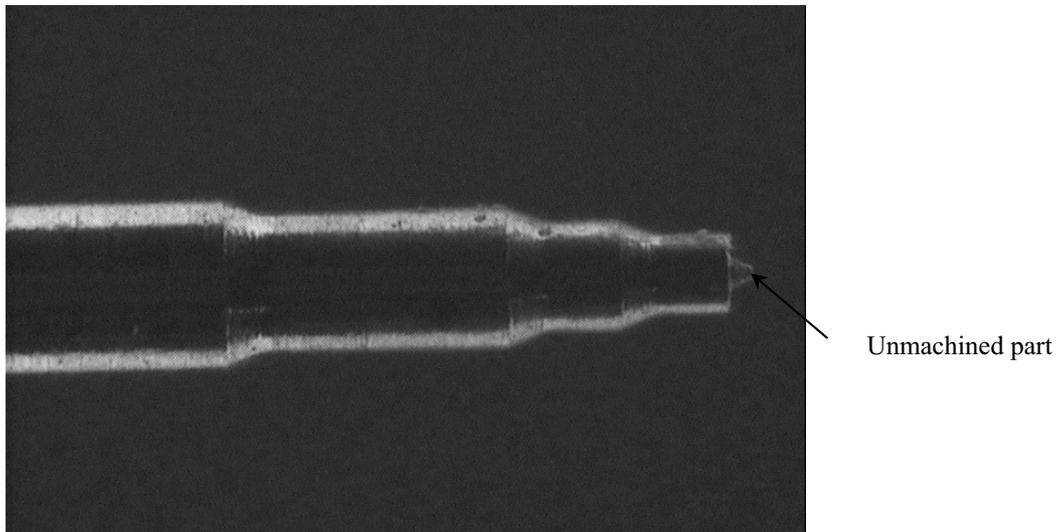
Defects in disk-2 cutting operation (scale of 1:0.000392)
